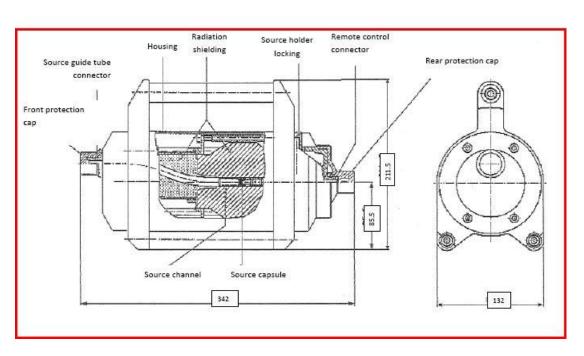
Drawing of TSI 3/1 GammaMat Package
